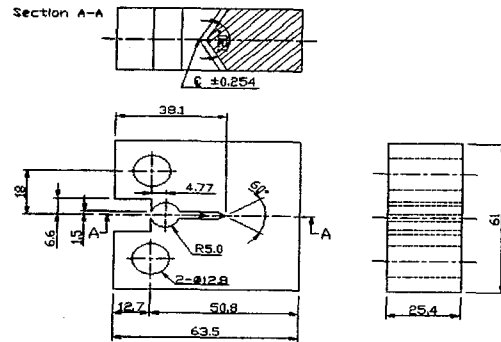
Dimensions of the specimen for fracture toughness test specimen
